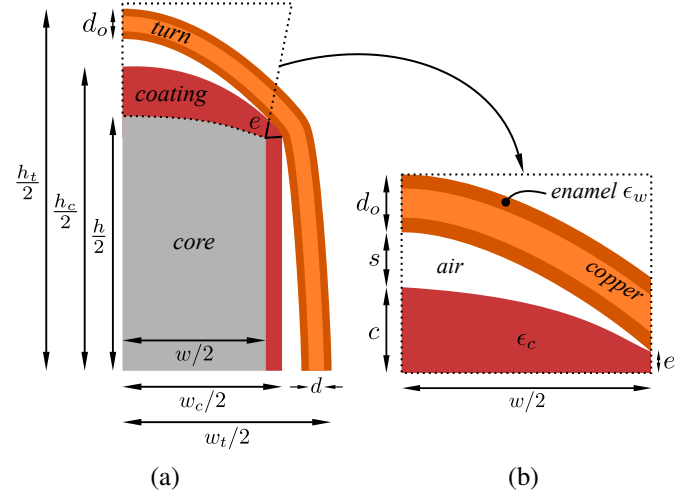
Close-up on a quarter of section: (a) Quarter of section B from Fig. 3(b) with measured dimensions, (b) details of the top face from the core surface with deduced dimensions.
